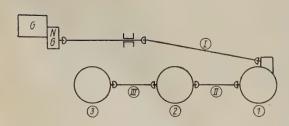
Diagram showing the arrangement of the shafts on one half of the six axled MaK 2×1000 HP Diesel locomotive.
